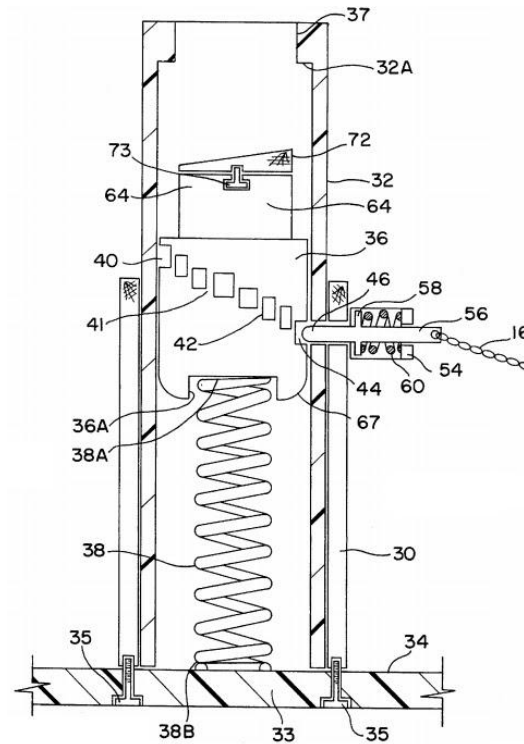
Striker piece is pressed down and spring loaded pin holds piece by locking into latching dente.
